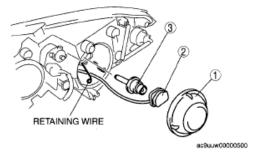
Identifying Discharge Headlight Bulb, Connector & Cover Courtesy of MAZDA MOTORS CORP.
